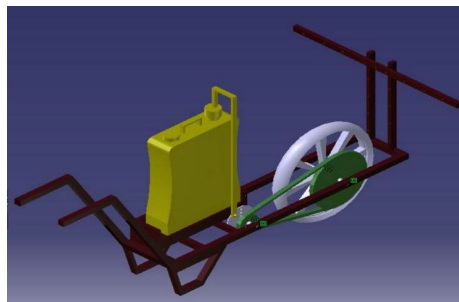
Multi-Nozzle Wheel Spray Pump.
